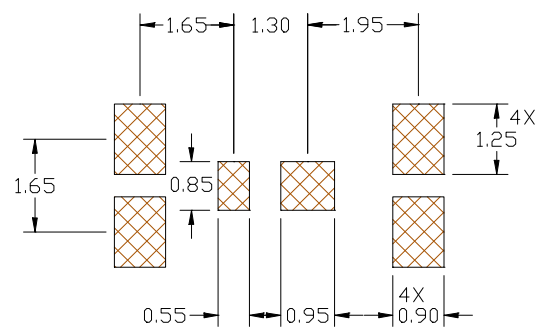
Recommended PCB Pad Layout for ICEPak 4.8x3.8mm-B
